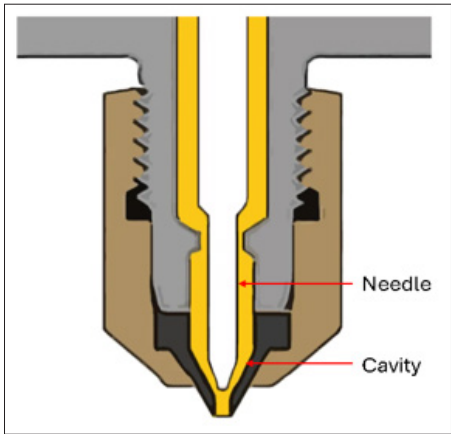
Fulfill® Retrofit Adhesive Fill Kit
